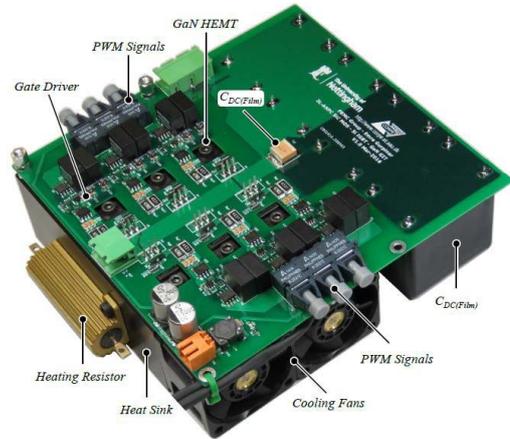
3-Level ANPC inverter assembly with indication of functional parts.
